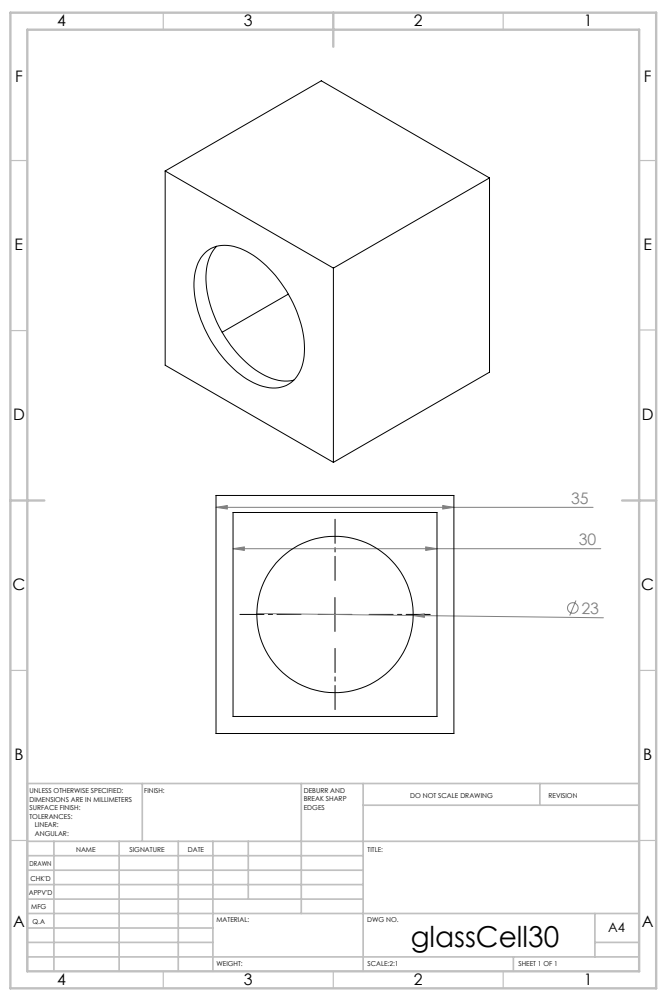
The design of the fused silica cuvette used as the vacuum chamber. All dimensions are in mm.
